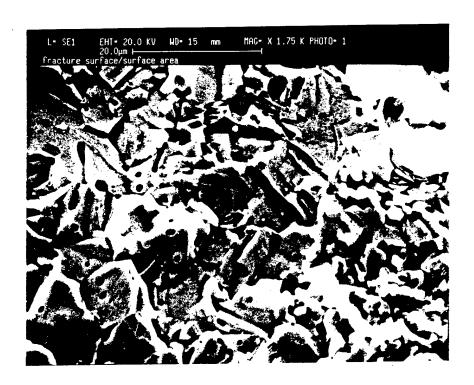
Fracture Surface Close to the Specimen Surface.
